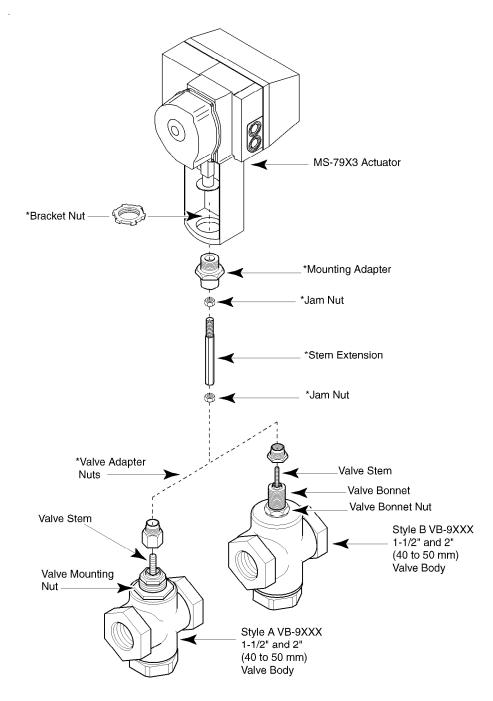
Typical Obsolete VB-9XXX 1-1/2" and 2" Valve Assembly.
